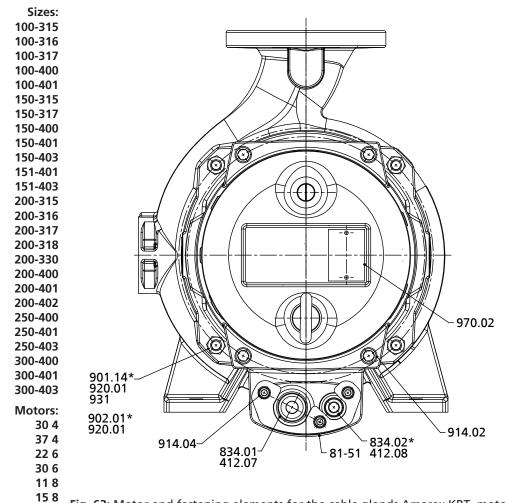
Motor and fastening elements for the cable glands Amarex KRT, motor type 3 with one or two power cables
